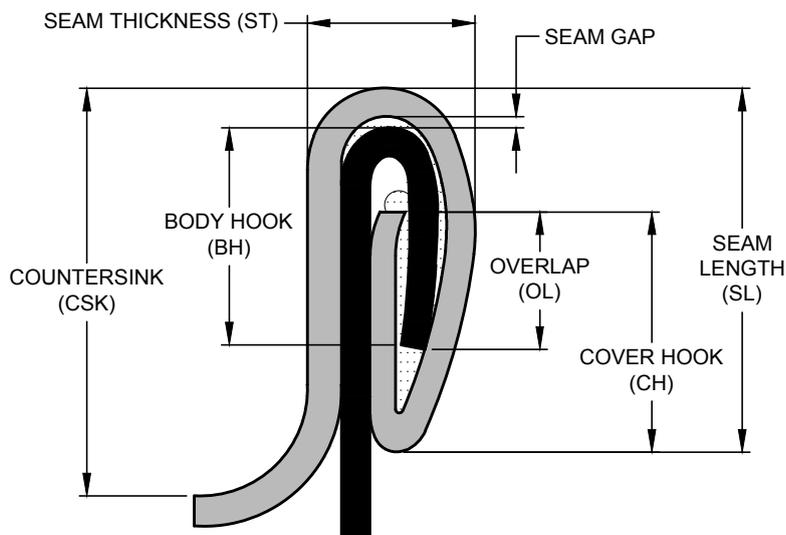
HERMETICALLY SEALED SEAM AREA DIAGRAM
